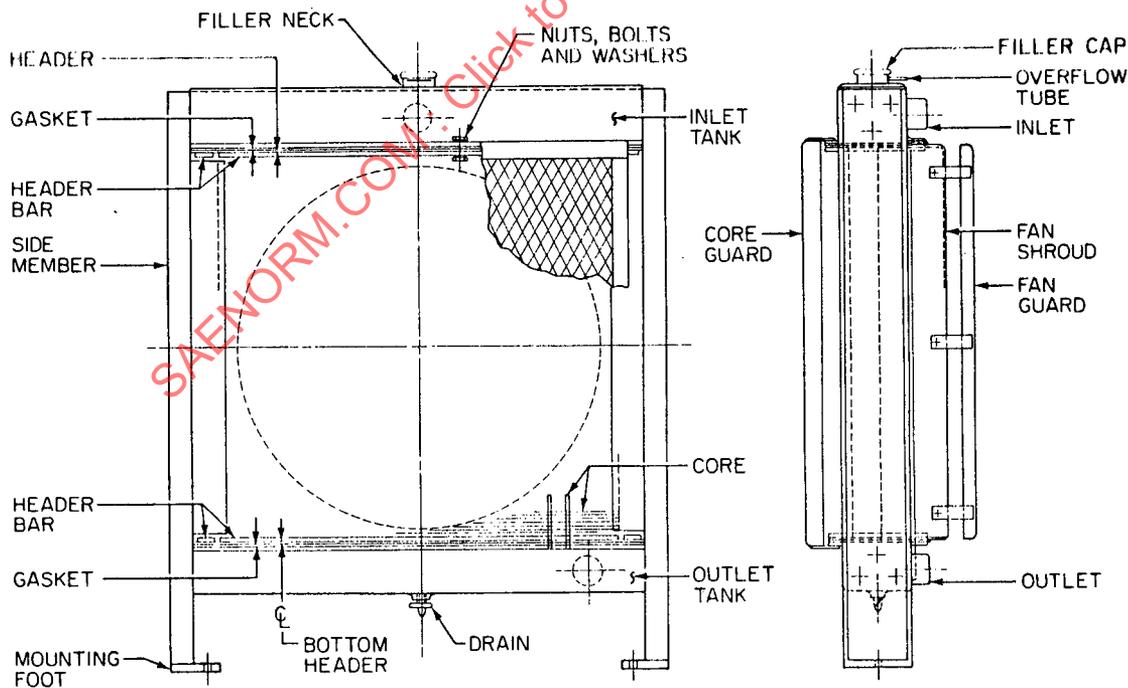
Fabricated Type (One-Piece Core) Radiator
